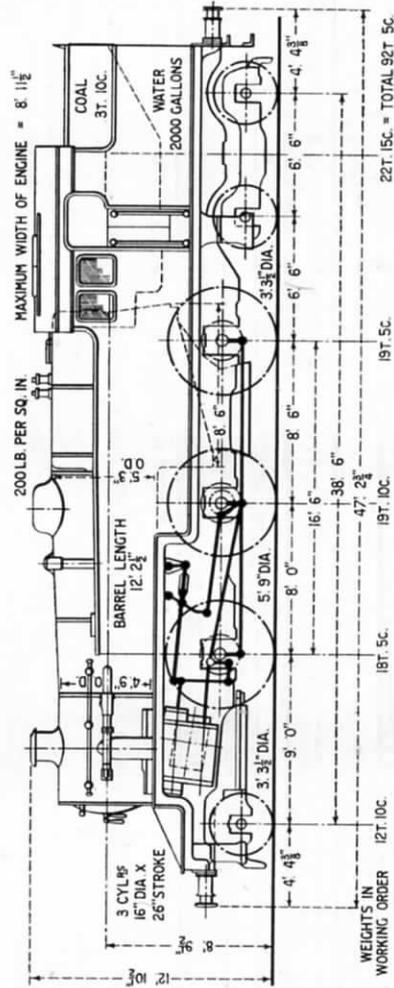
"4P" CLASS THREE-CYLINDER 2-6-4 TANK ENGINE, L.M.S.R., WITH TAPER BOILER.
